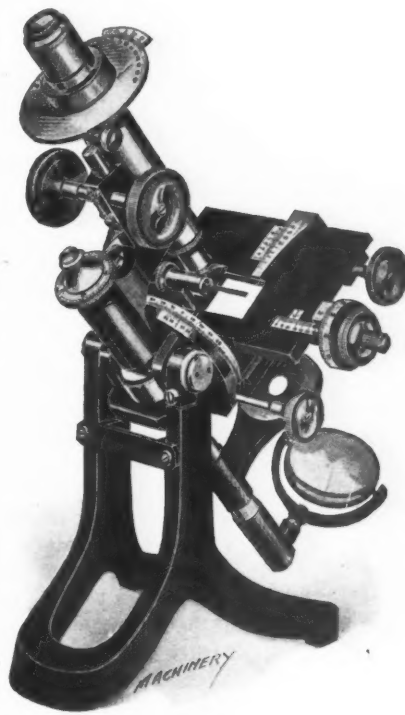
Schuchardt &amp; Schutte Microscope for measuring Screw Threads
